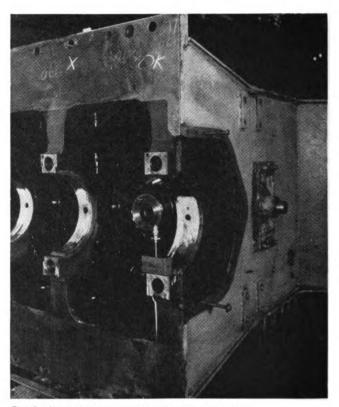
Jig to hold the mike while taking measurements horizontal to the plane of the engine
